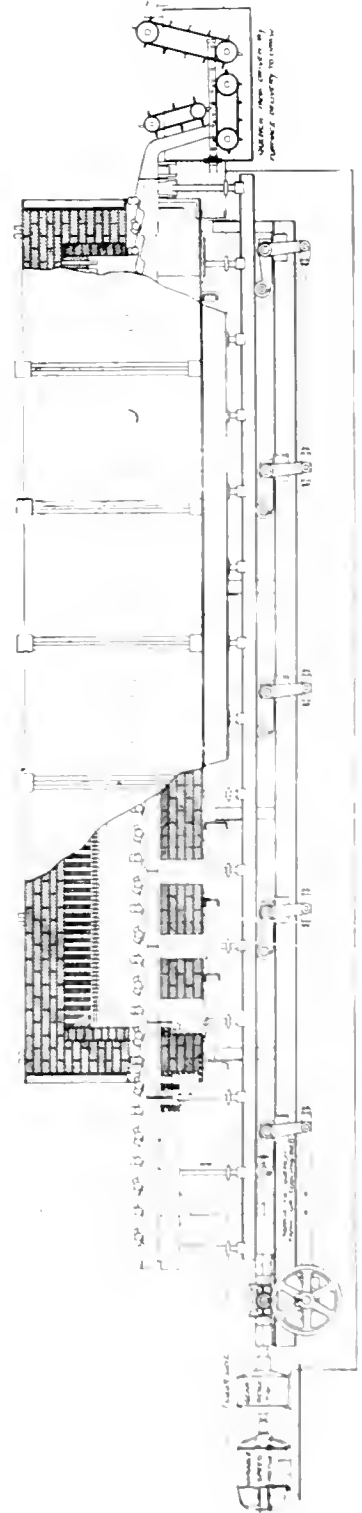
Conveyor Furnace with Automatic Quench for Large Production of Such Parts as Automobile Cranks and Axles
